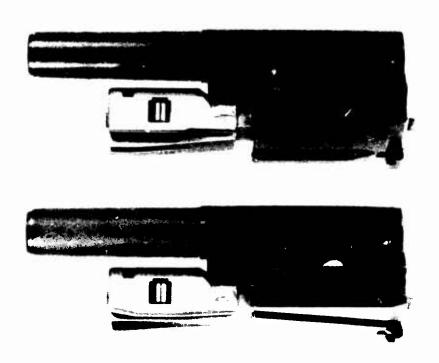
Difference between Left Sides of HK-23Al Machine Gun Bolt-and-Carrier Assemblies Used for Belt-Fed (TOP) and Magazine-Fed (BOTTOM) Weapon Configurations.
